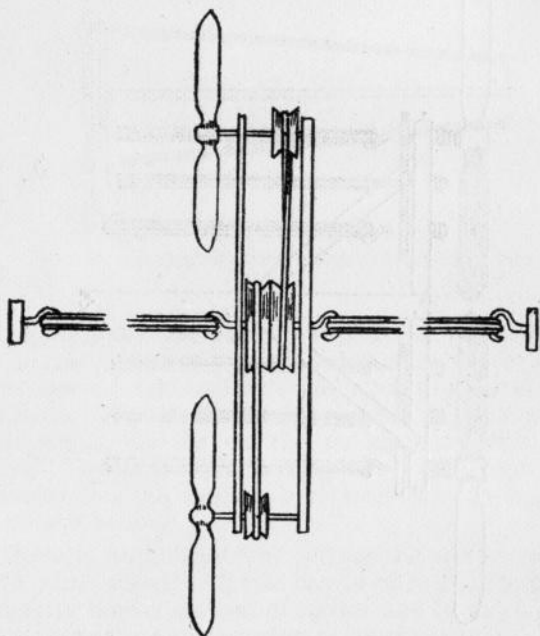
A double screw arrangement driven by a balanced elastic motor, the power being conveyed through belts.
